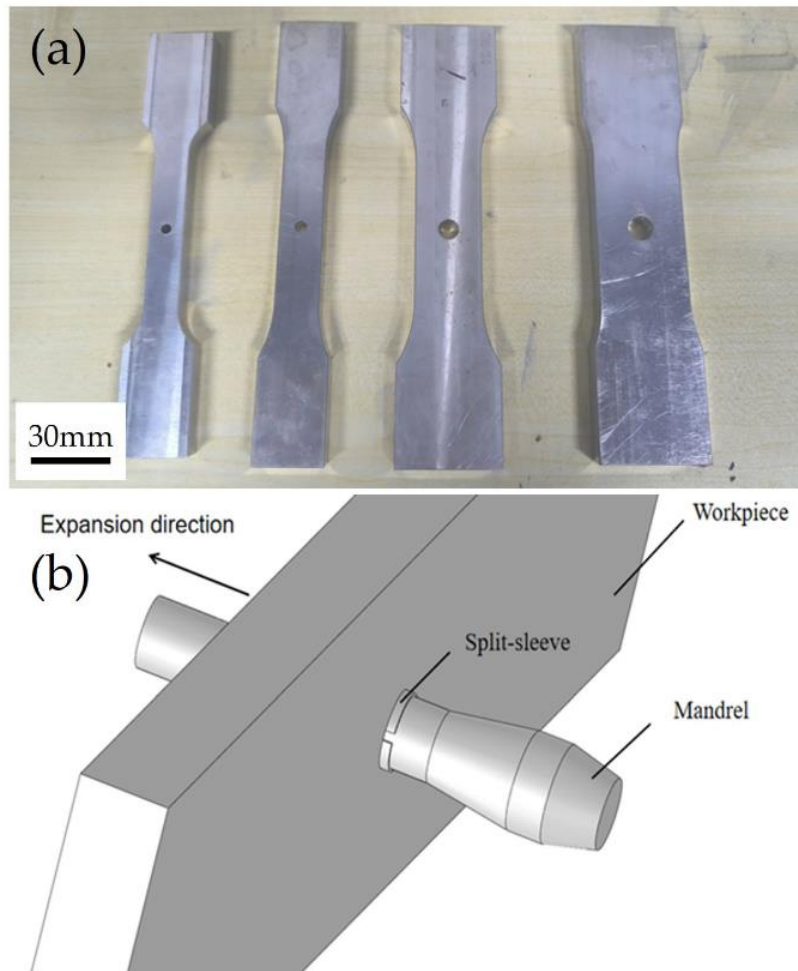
(a,b) Cold-expanded specimens and the illustration of the split-sleeve cold expansion process
